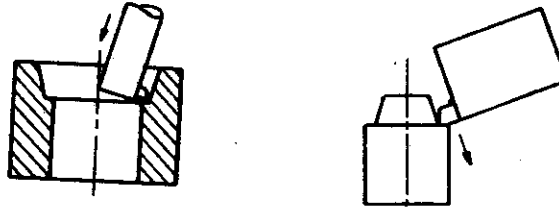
(a) Taper boring operation (b) Taper turning operation
